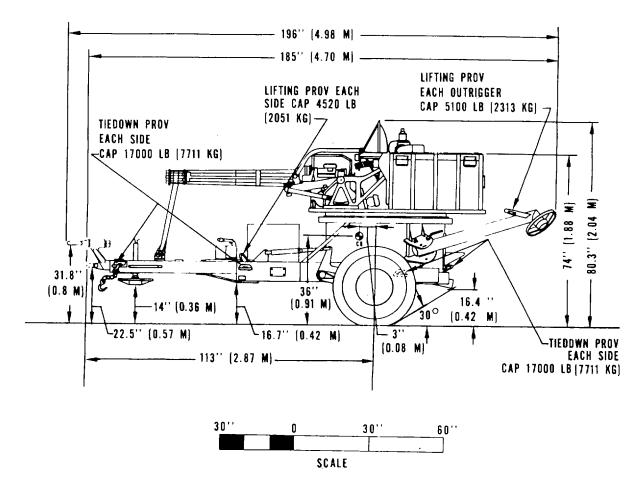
Side elevation, Gun, Air Defense Artillery, Towed, 20-mm, M167A1. 2-6
